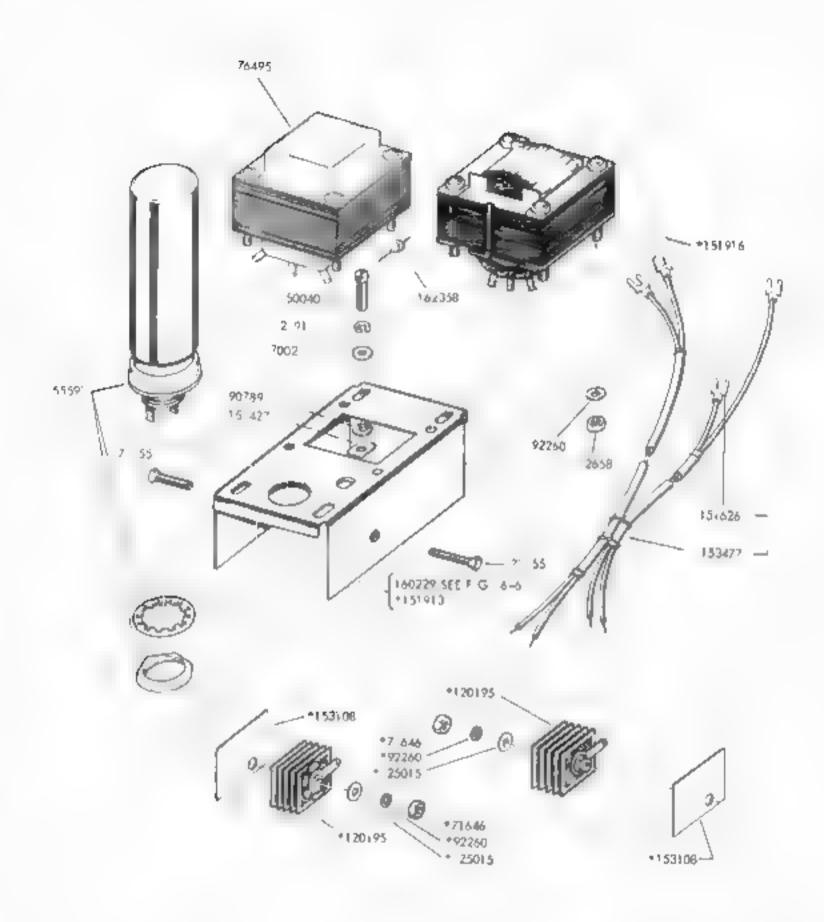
162361 RECTIFIER AND CABLE ASSEMBLY (500 MA)
